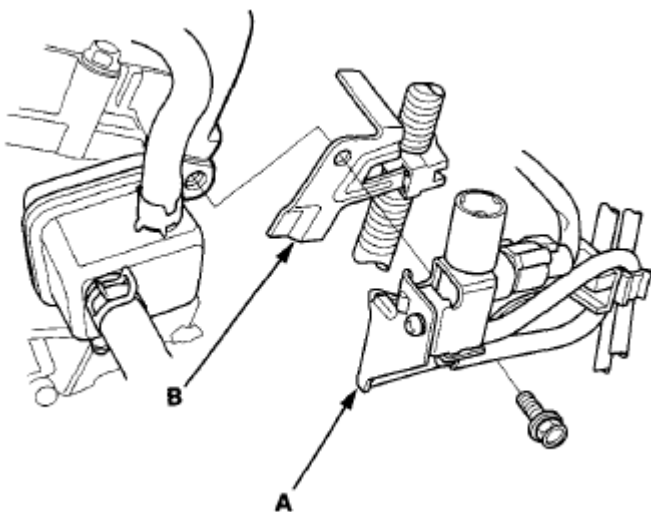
Removing Engine Mount Control Solenoid Valve Bracket And Harness Bracket From Rear Cylinder Head
